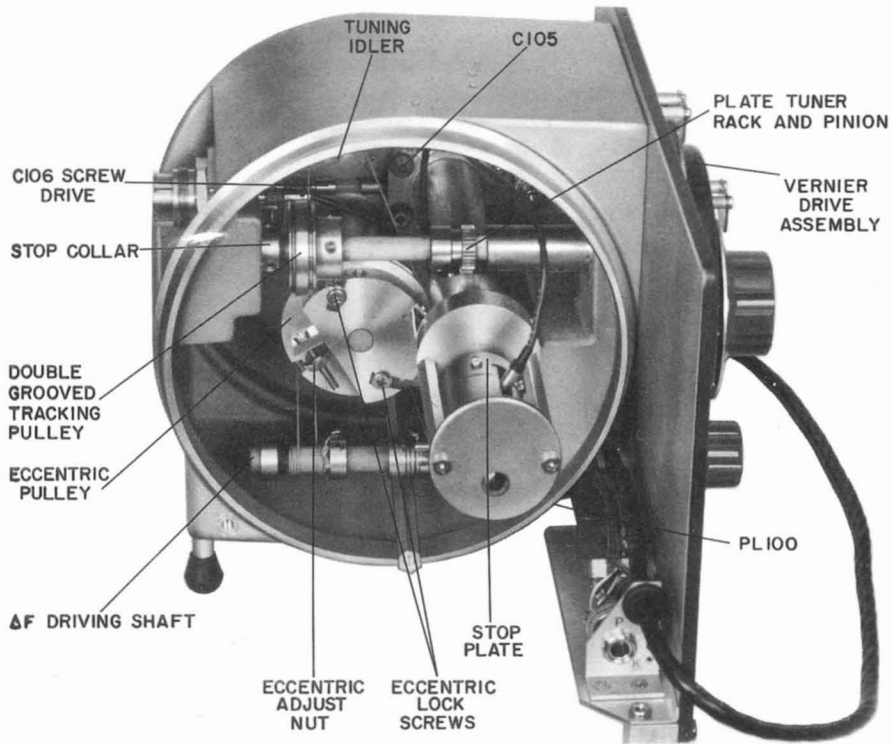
Interior view of Type 1218-B oscillator with shield cover removed showing tuning-adjustment points.
